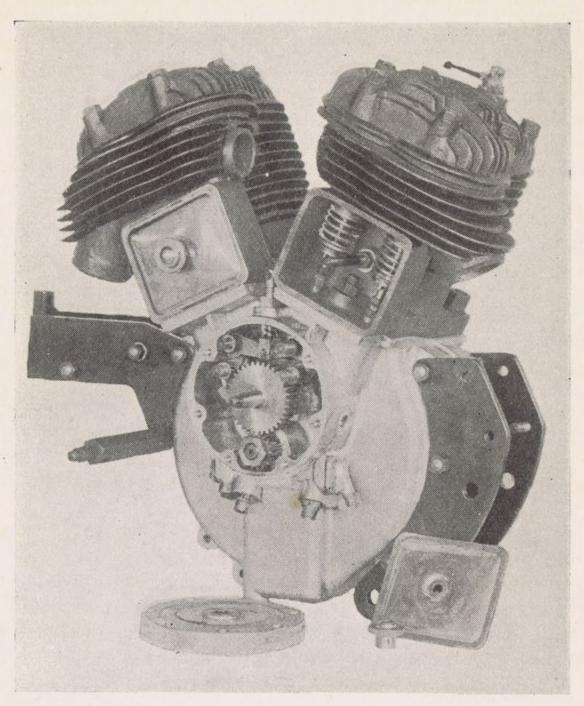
CLOSE-UP VIEW OF THE 9.90 H.P. S.V. VEE-TWIN ENGINE
